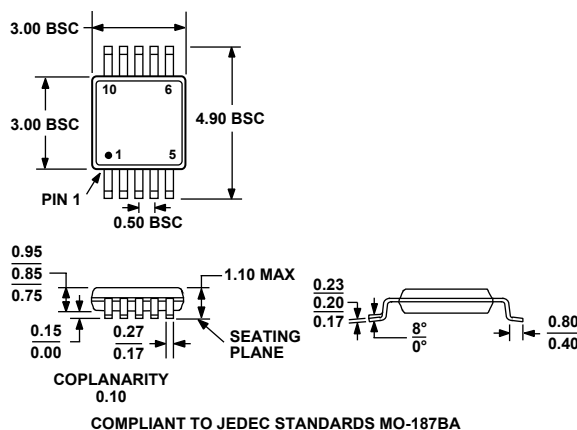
10-Lead Mini Small Outline Package [MSOP]
